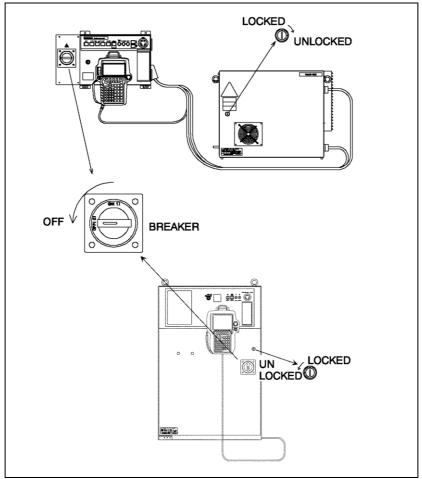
(a) Circuit breaker and latch of robot controller
